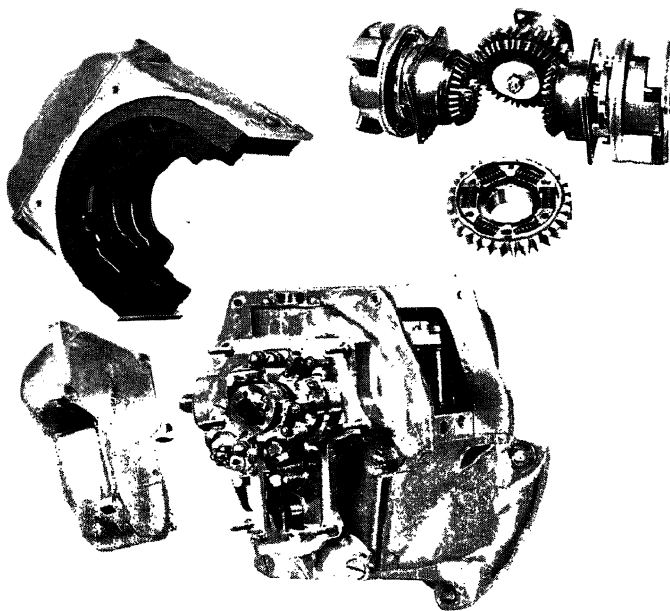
One of the Bristol shielded magnetos and details of the engine drive.
